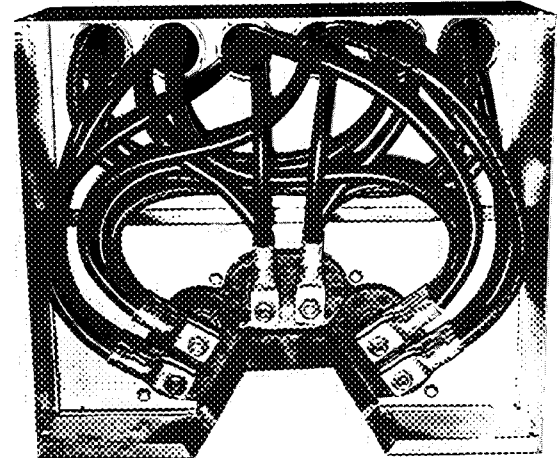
Compressor Terminal Arrangement 18-Lead, Rear Inlet
